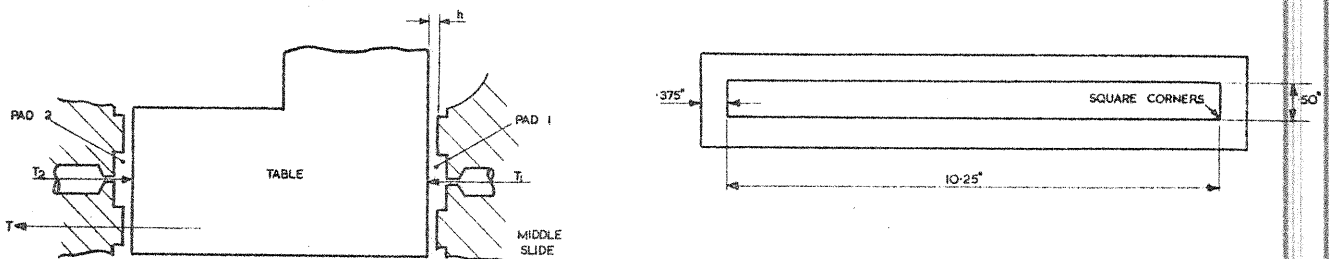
VERTICAL SECTION THROUGH TABLE SLIDE BEARING SHOWING DETAILS OF VERTICAL PADS.
